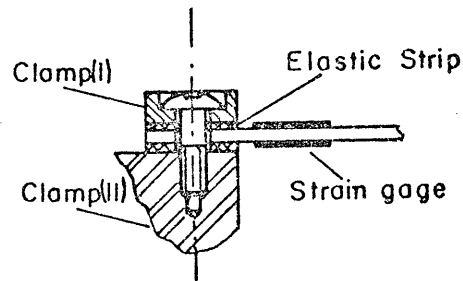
ALTERNATIVE CLAMPING ARRANGEMENT
